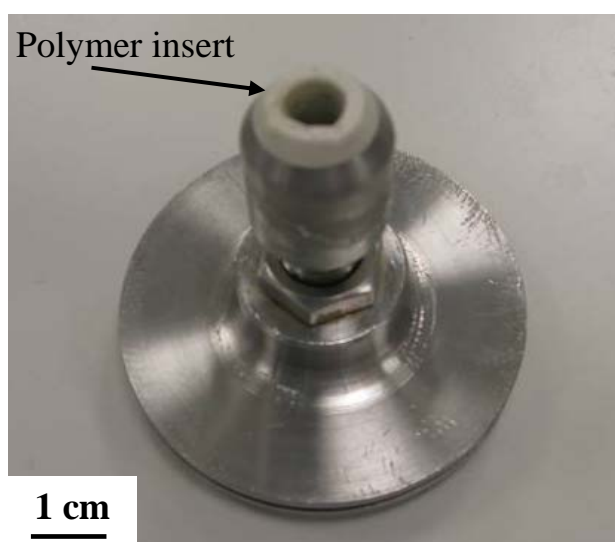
Stainless steel holder for the head modified with a polyethylene insert.
